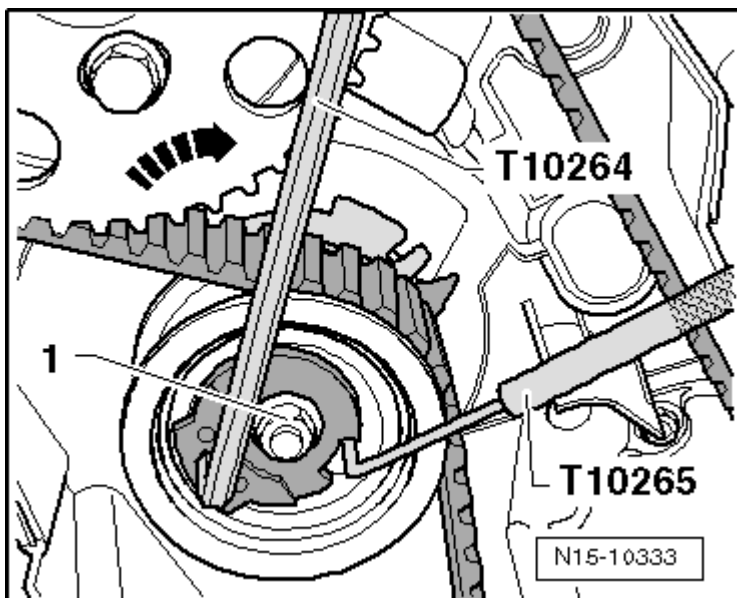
Identifying Long Reach T10264 And Locking Tool T10265
